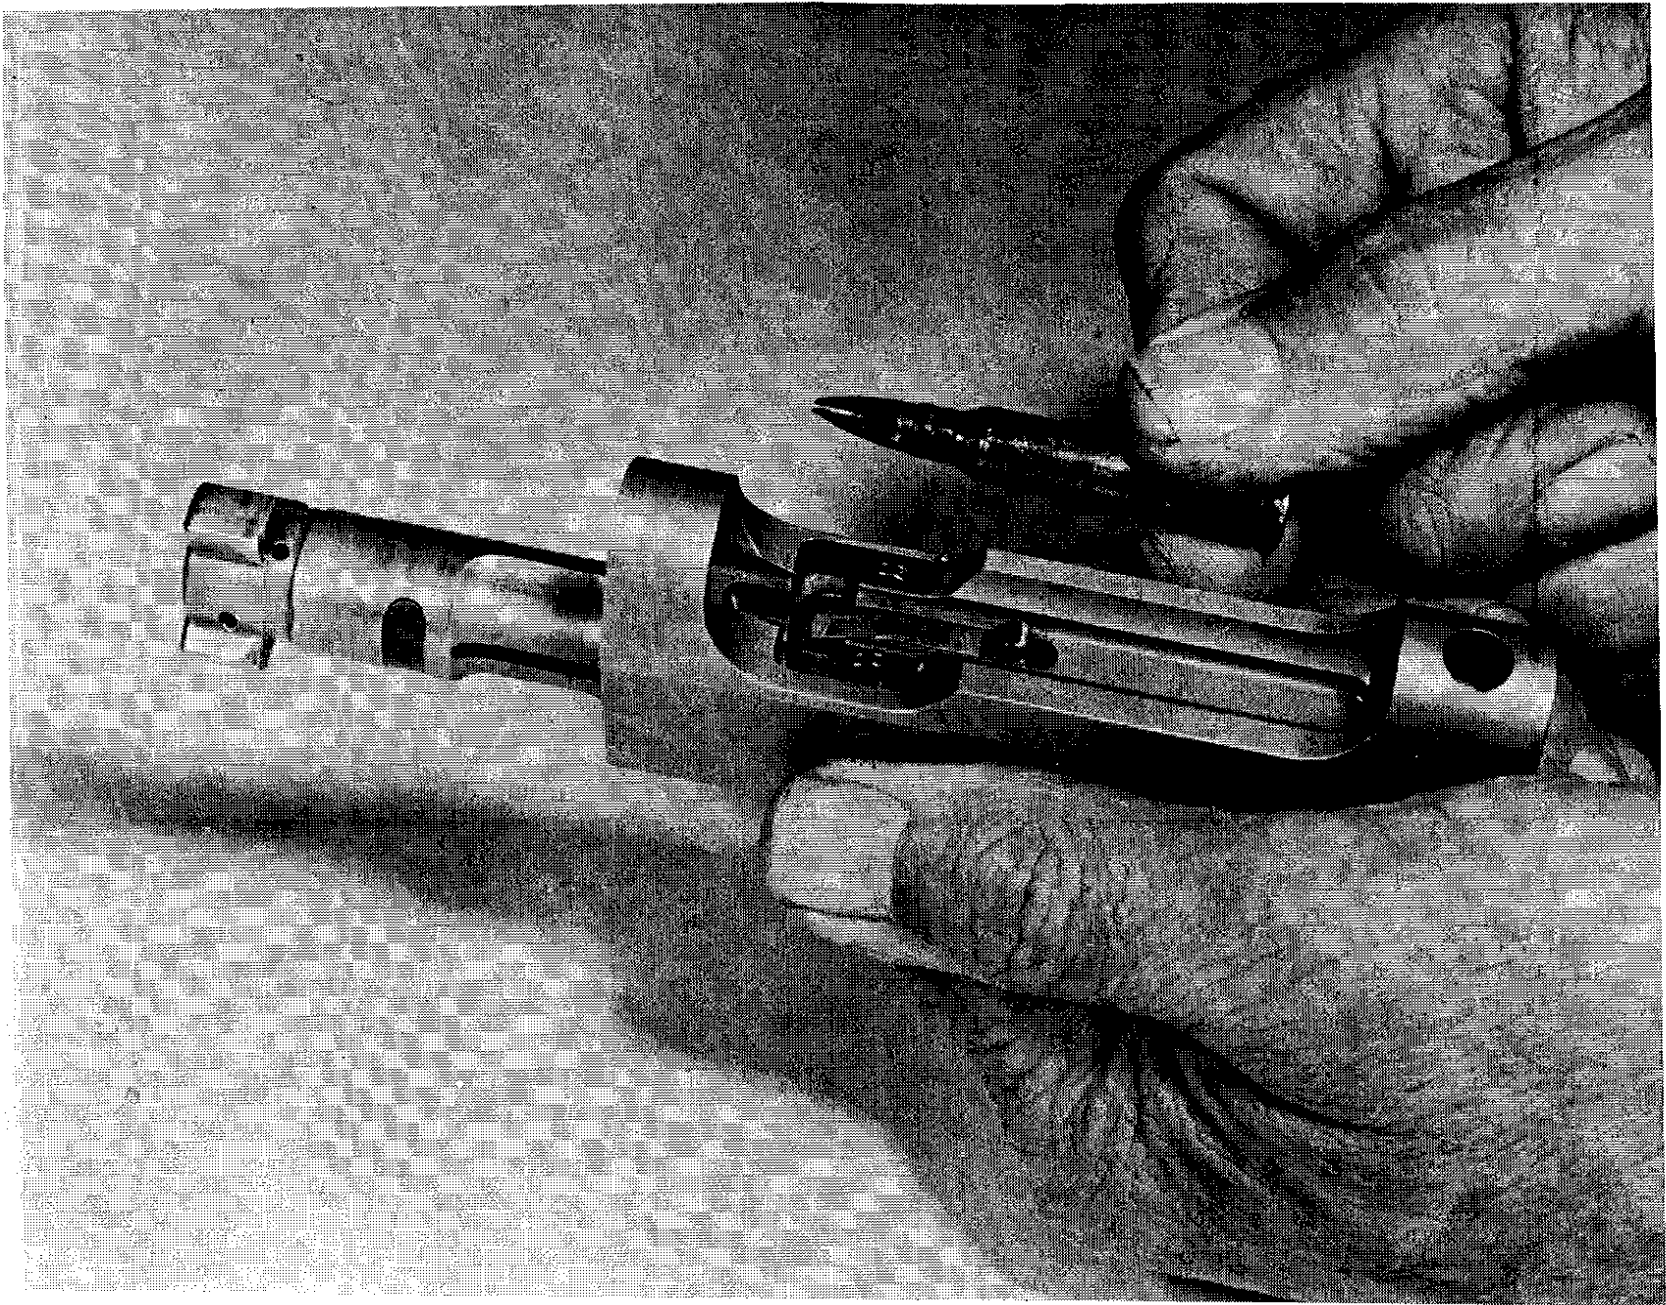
Preparing to Remove Bolt from Bolt Carrier
